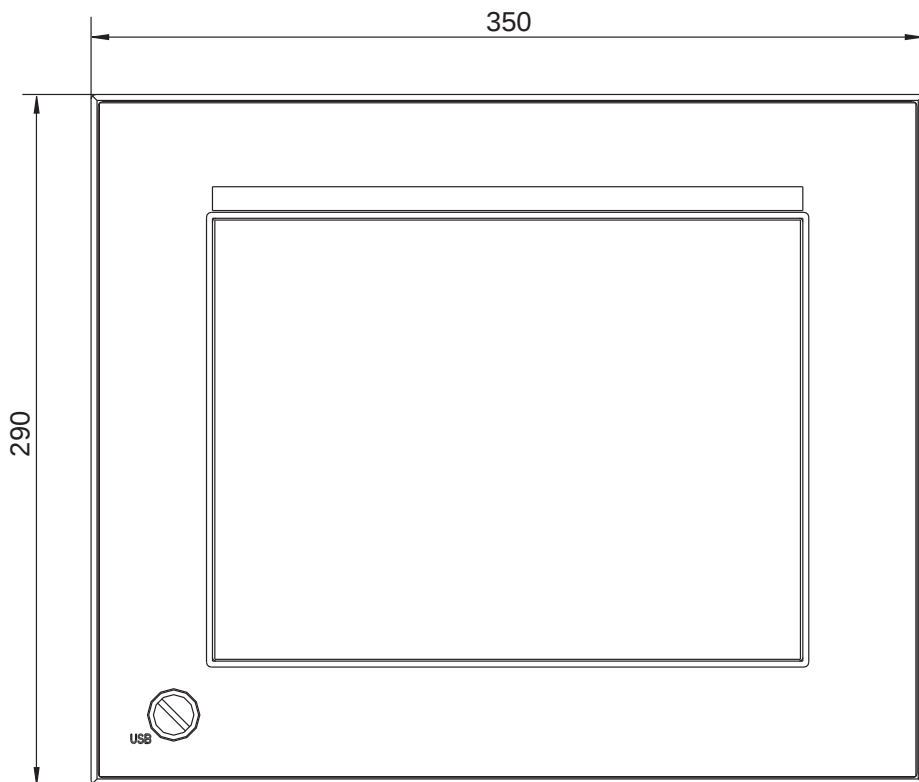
Dimensions: Front panel of the VDP 16.3DB
